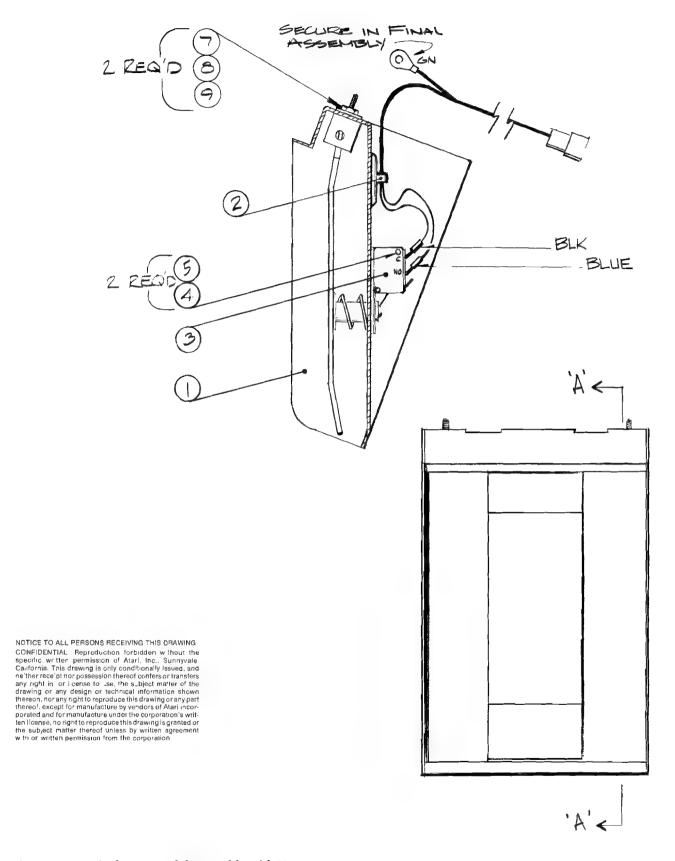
Single Foot Pedal Assembly with Harness Assembly A008845-01 C
